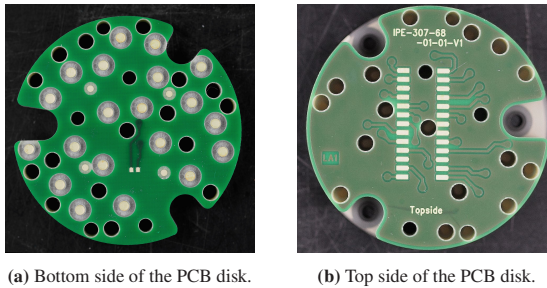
PCB disk for electrical connection of the composite disk. The drill holes enable the molding of acoustic backing material to the rear of the piezoceramic fiber.
